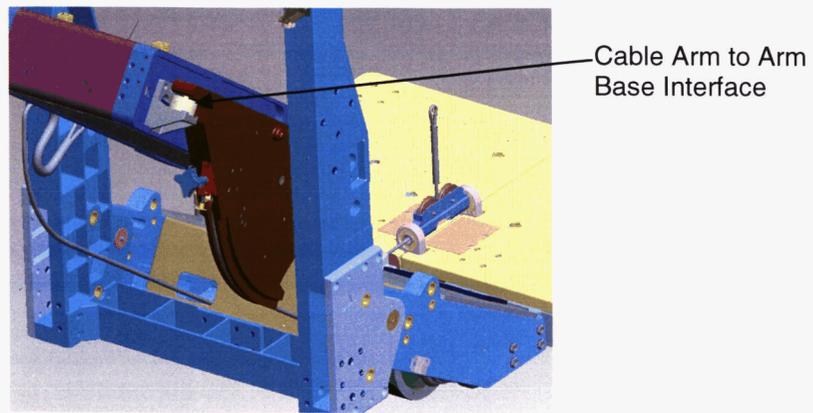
ARED Arm Base Assembly (Top Cover Removed)
